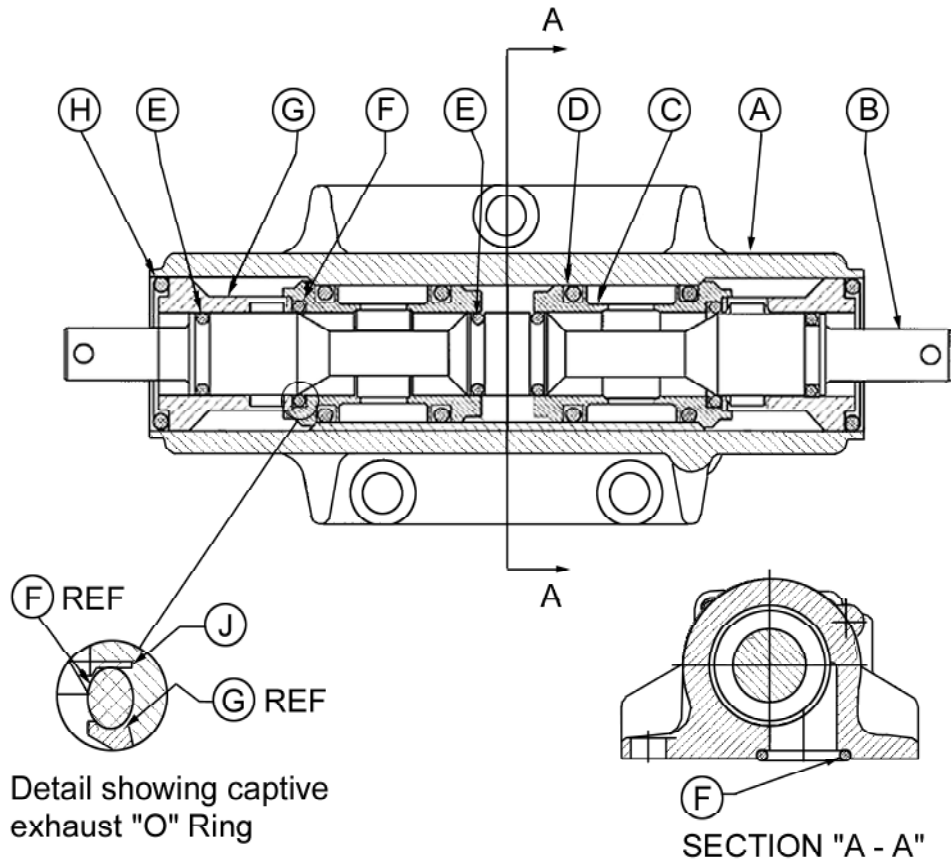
Valve Body Assembly For DA-10 Switch Machine
